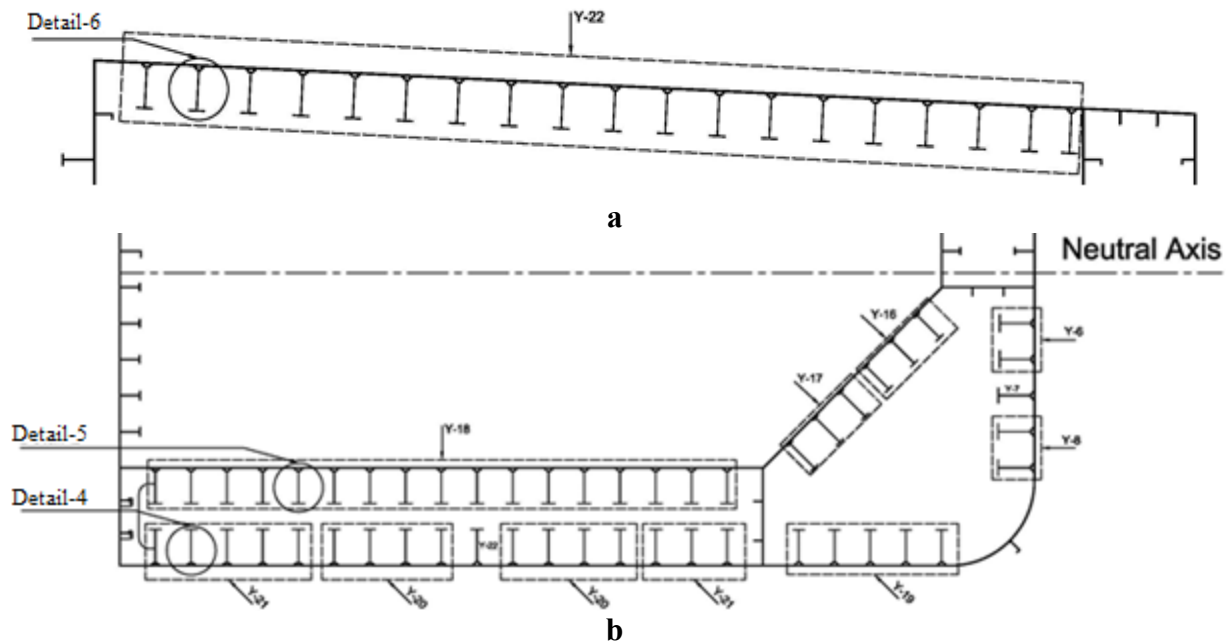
Midship section with bulb plate stiffeners replaced with Y-stiffeners in the deck structure
